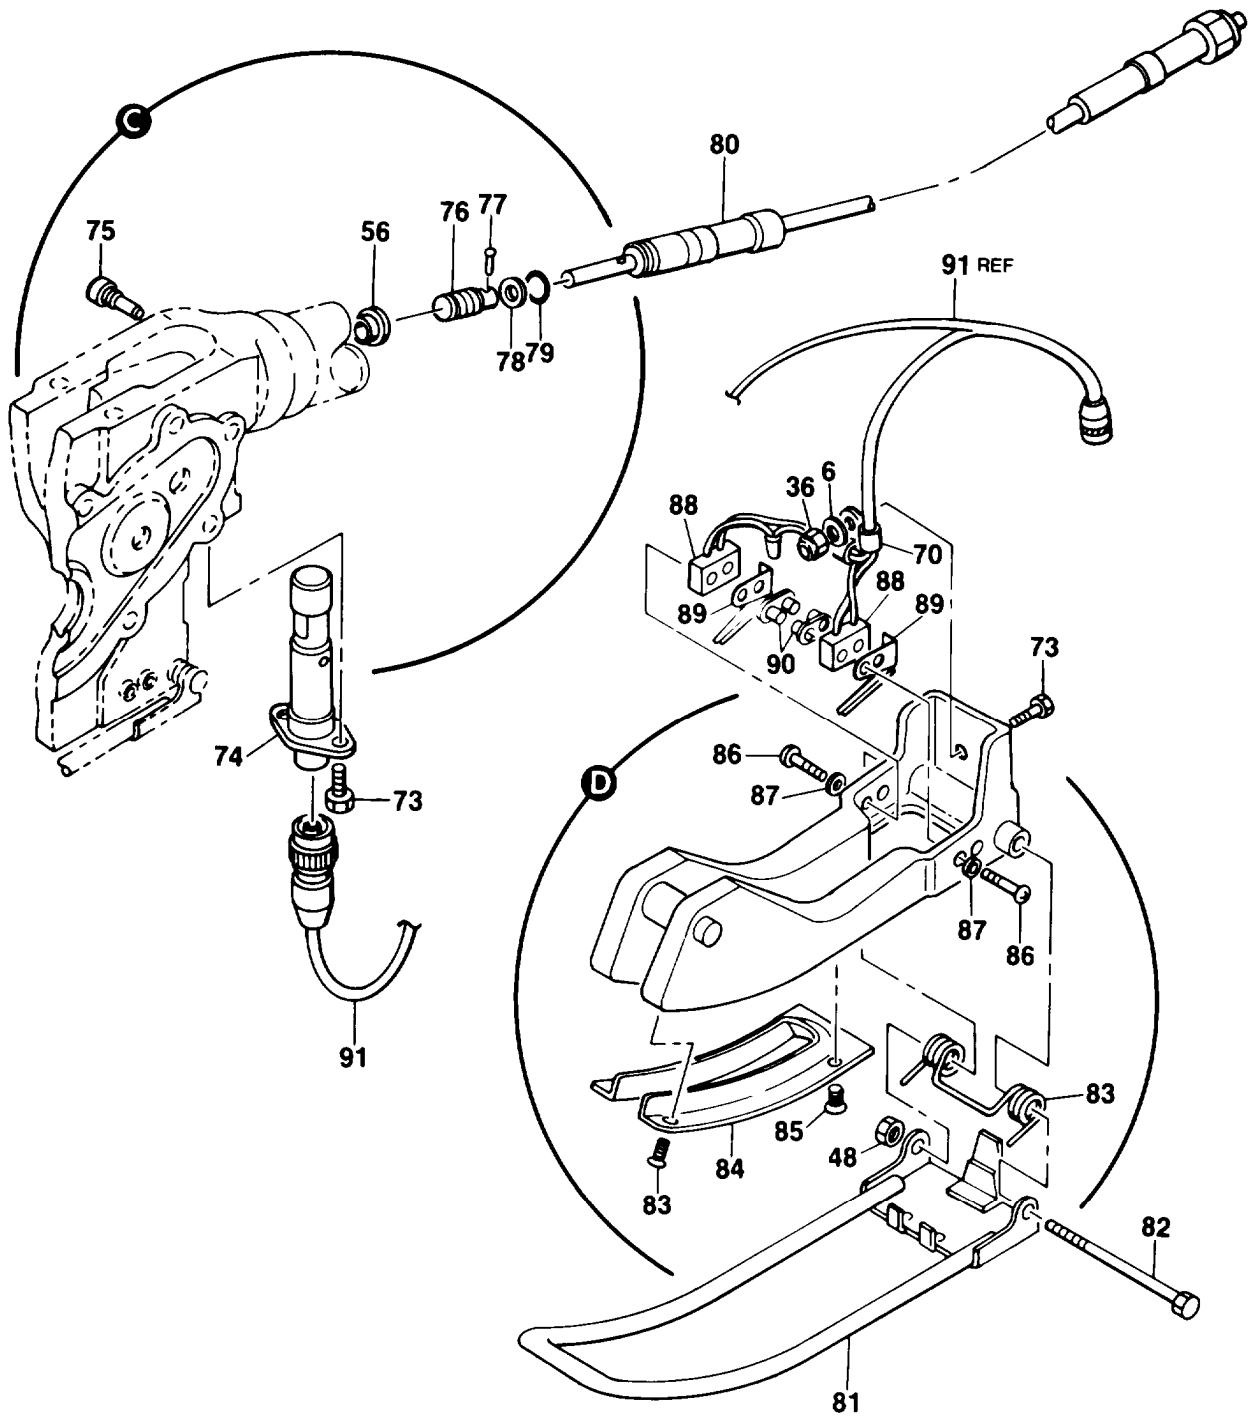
BOOM HEAD ASSY (SHEET 3 OF 3)
